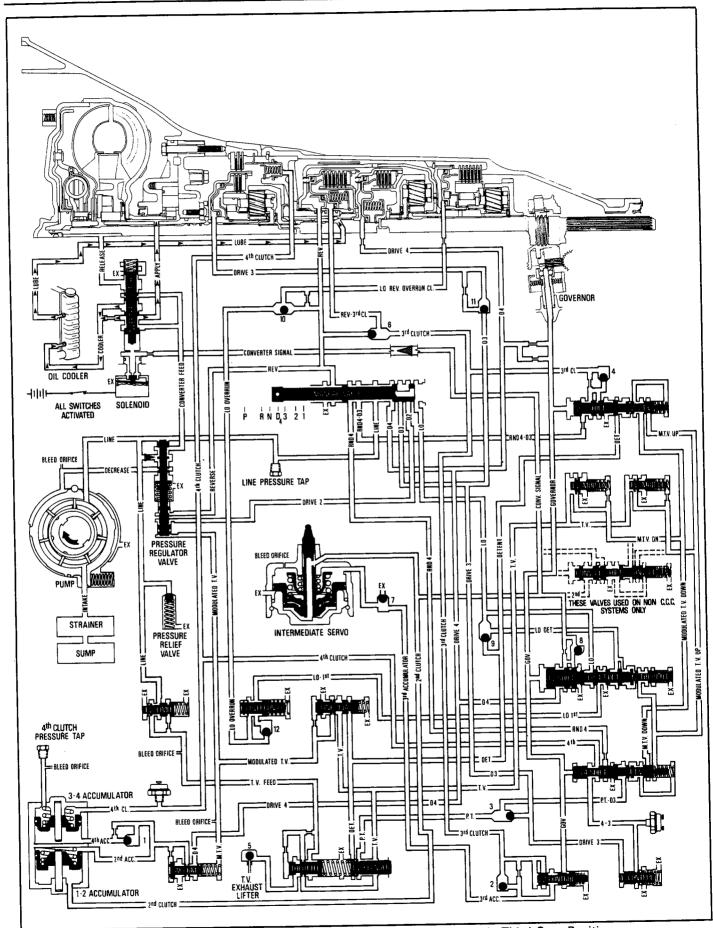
Part Throttle 4-3 and Modulated Downshifts - Valves in Third Gear Position
